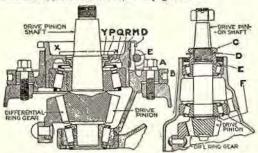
(left). Timken Models 5114, 5140, rear-axle drive pinion. Note oil seal (Q). Bearing adjustment, by turning (M); mesh of drive pinion and ring gear, by turning (B).
